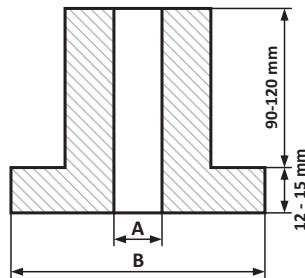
Special Tool for assemble of Ball Bearing and Lip Seal.
